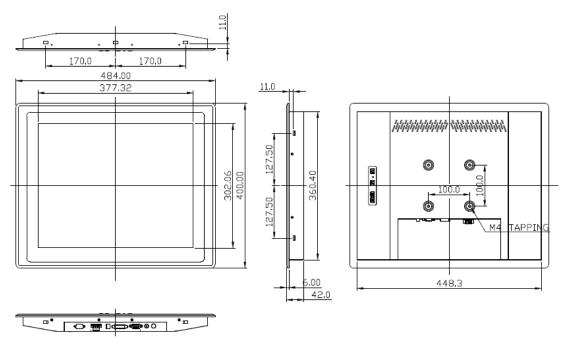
Dimensions of rear side OSD ADP-1198P
